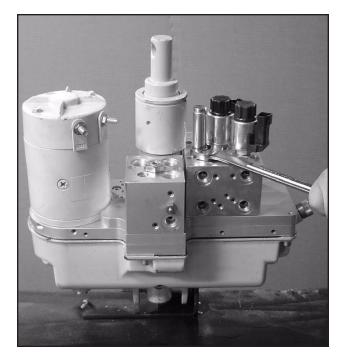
The "S6" Cartridge is removed using a 7/8" wrench or deep well socket.
